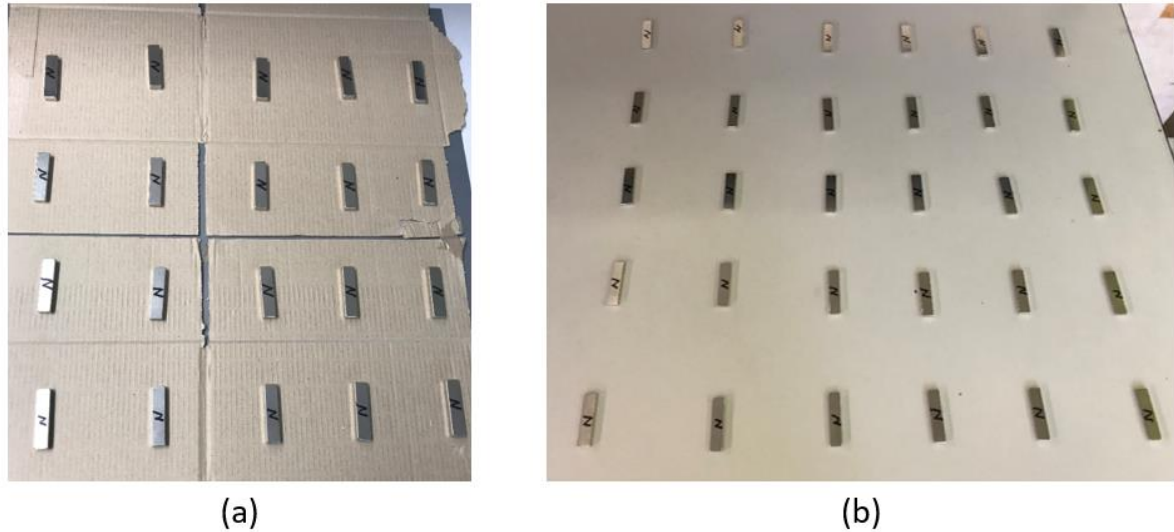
5: Un-assembled magnets after checking and marking their polarities (a) IMCP magnets (b) VCP magnets
